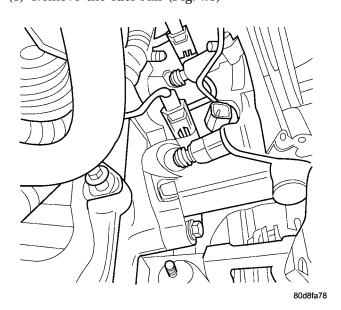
FUEL RAIL AND FUEL INJECTOR
